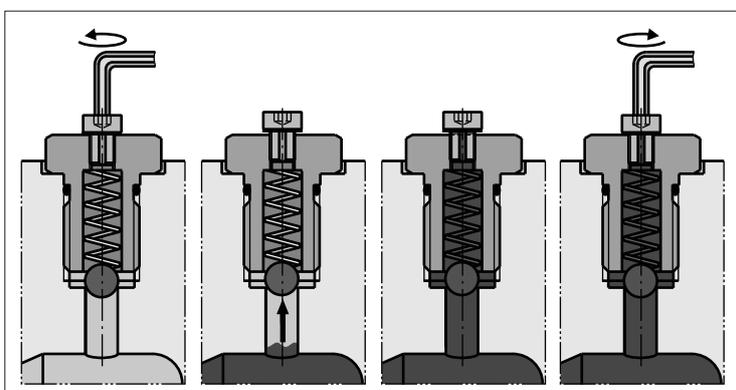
Filling and bleeding hydraulic cylinders with check valve
